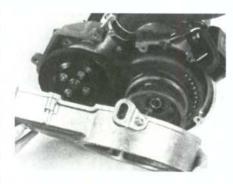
Removing magneto housing cover on liquid-cooled engines.
